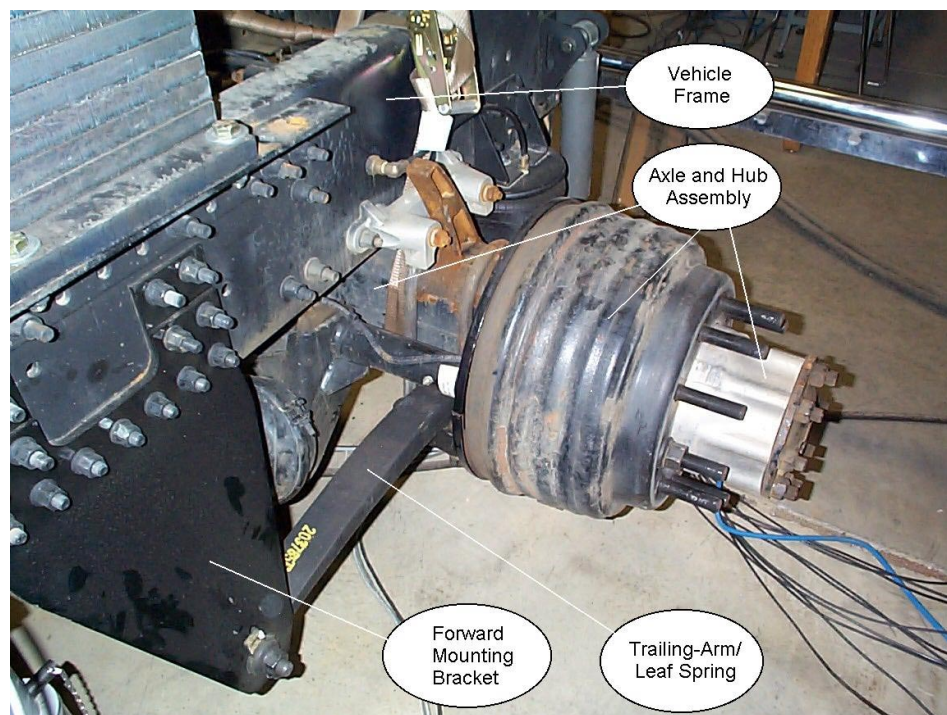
Prototype Trailing-Arm Drive Axle Suspension – Front View.
